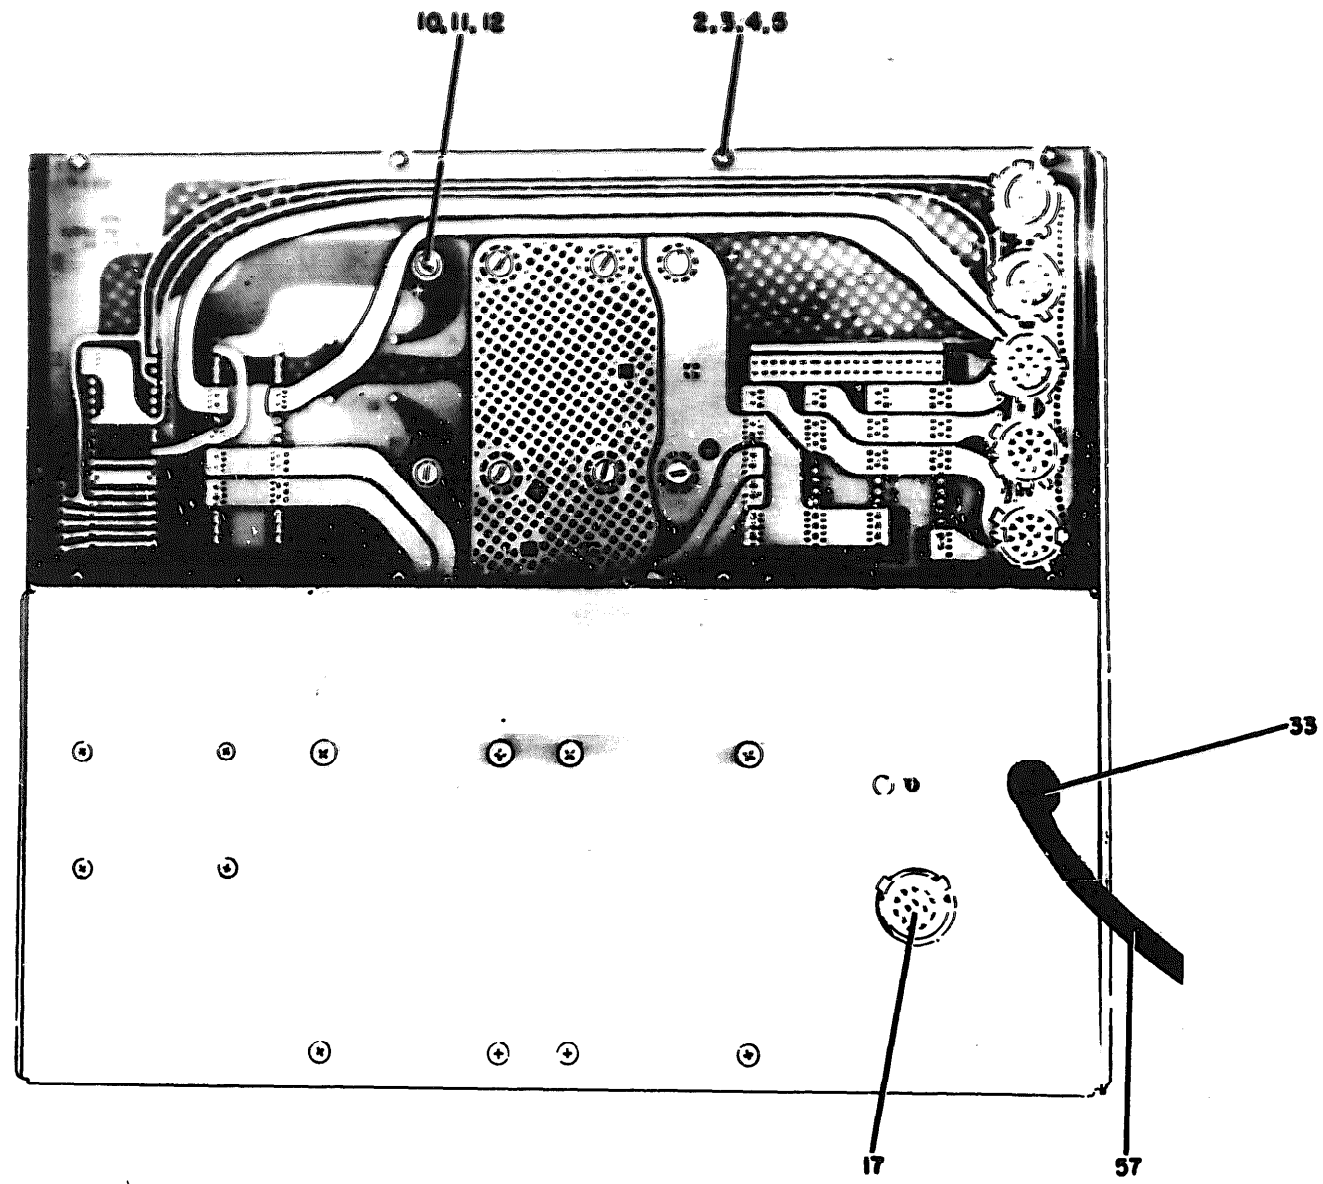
Circuit Card Assembly, Chassis (Sheet 3 of 4) 2-122
